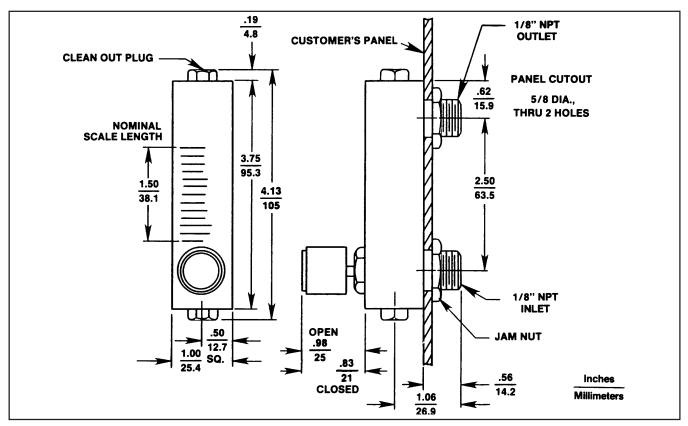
Model 2001 Dimensions, Sizes 2-6 (Front Panel Mounting)
